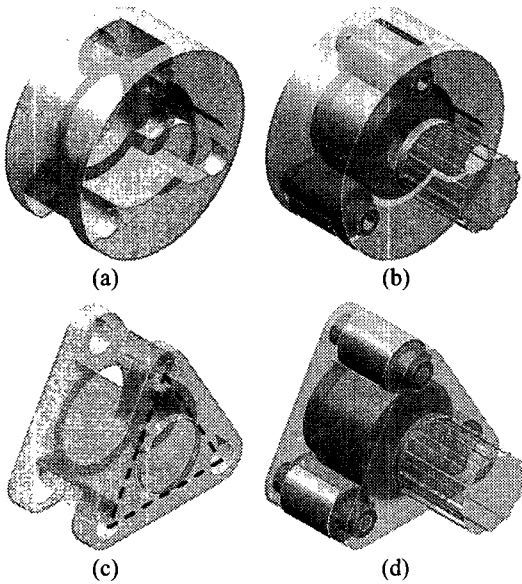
Synthesized shapes of carrier and assembled structures (Not showing ring gear)
